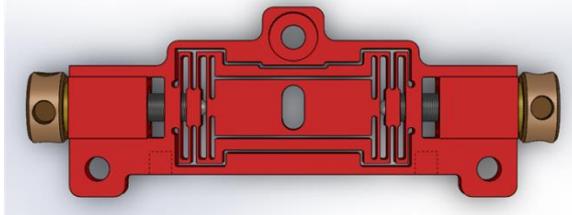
Top view of individual lens holder lateral adjustment mechanism with adjuster screws and locking screws attached.
